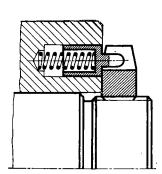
Locking circular nut with spring plunger (the plunger is sunk by face spanner during nut torquing)
